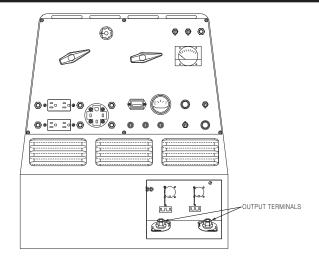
WELDING CIRCUIT CONNECTIONS
